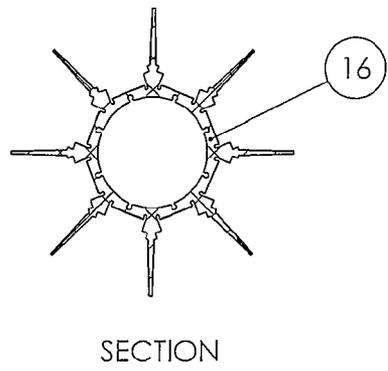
8-Sided LED Fixture Assembly w/ Extruded Fins and Heat Sink
